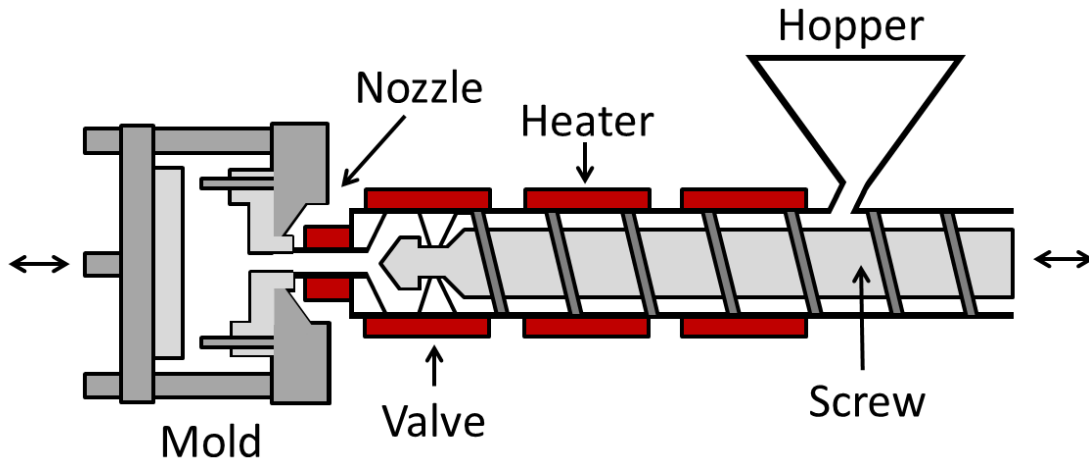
Reciprocating screw-type injection molding machine.⁴²
